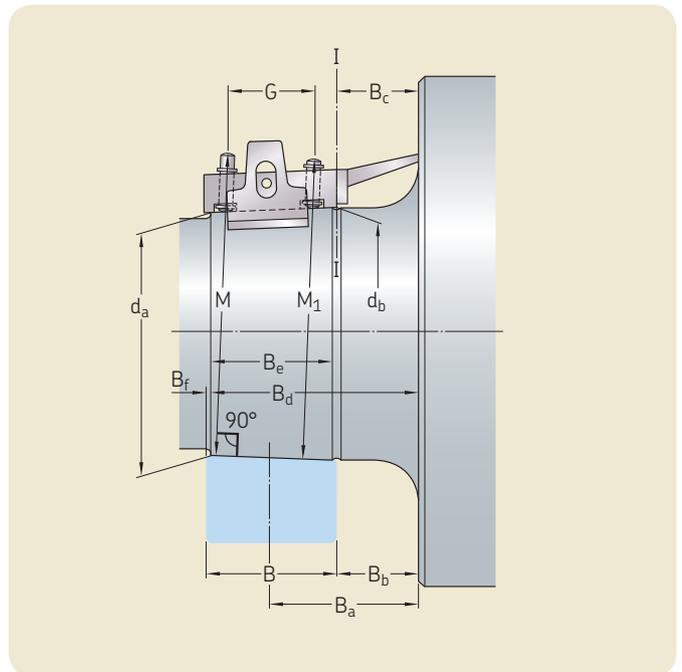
The dimensions required for using the SKF 9205 taper gauge.
